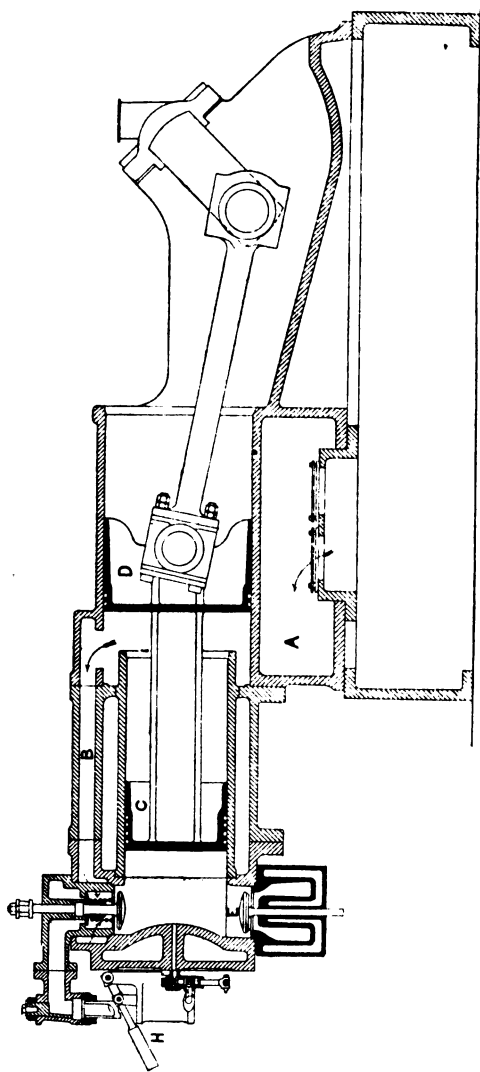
LONGITUDINAL SECTION OF PREMIER GAS ENGINE.
